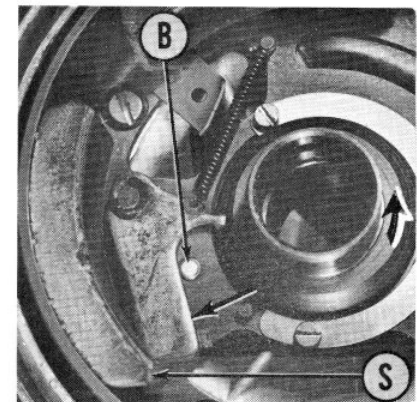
Breaker cam is fully advanced when advance weight is in contact with flywheel magnet (S). On some engines, a bolt (B) can be dropped in hole provided to block the cam in advanced position for engine timing as shown.
